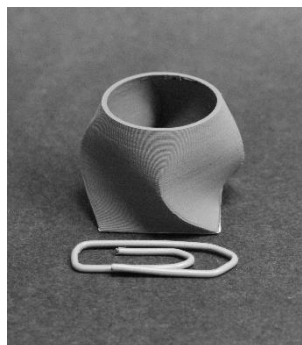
316L stainless steel demonstrator part made by FFF (Courtesy Fraunhofer IFAM)
